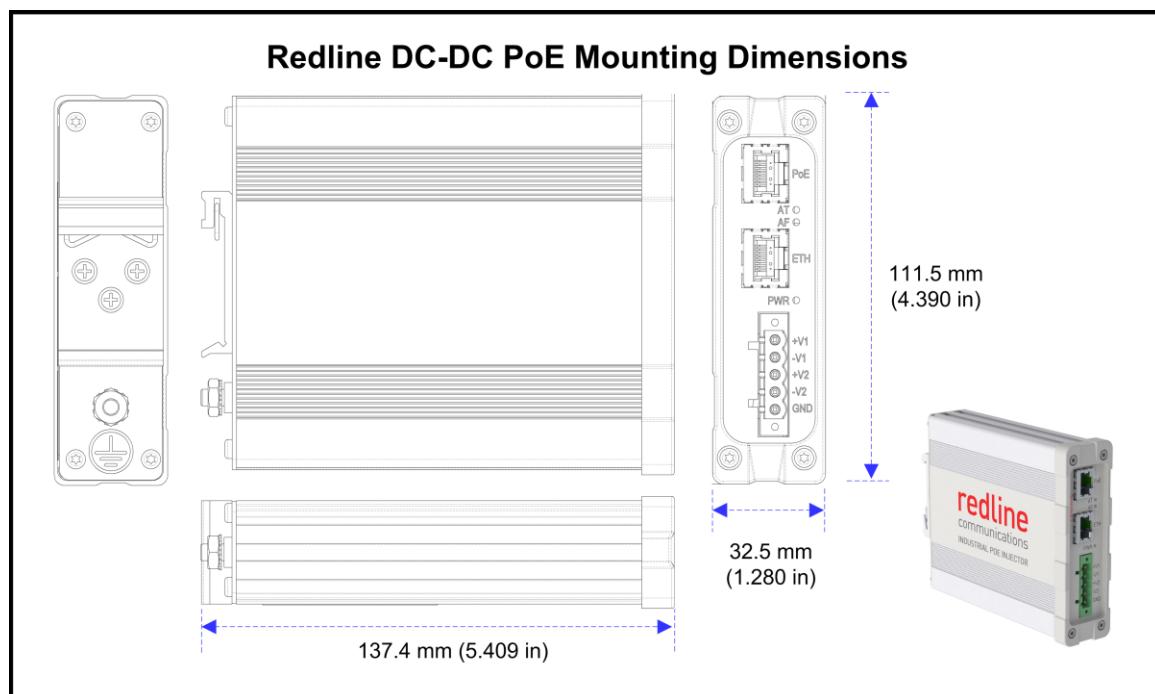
Reference: DC-DC PoE Mounting Dimensions
